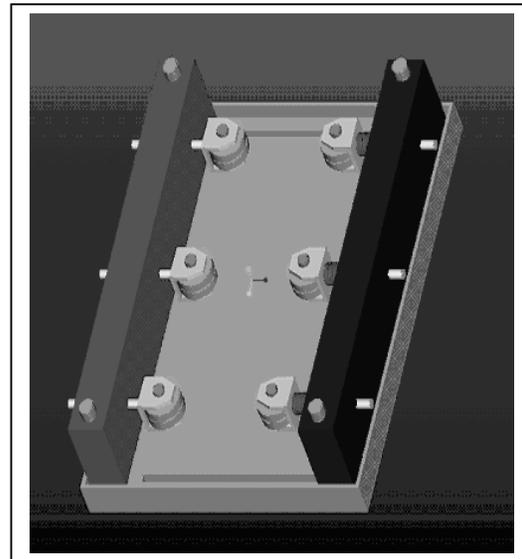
Solid Model of Sensing Unit of Online Inspection Gauge
